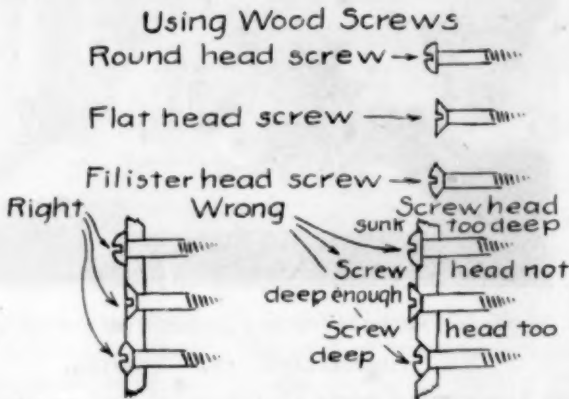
IMPORTANT POINTS TO WATCH IN BORING AND COUNTER-SINKING SCREW HOLES.
